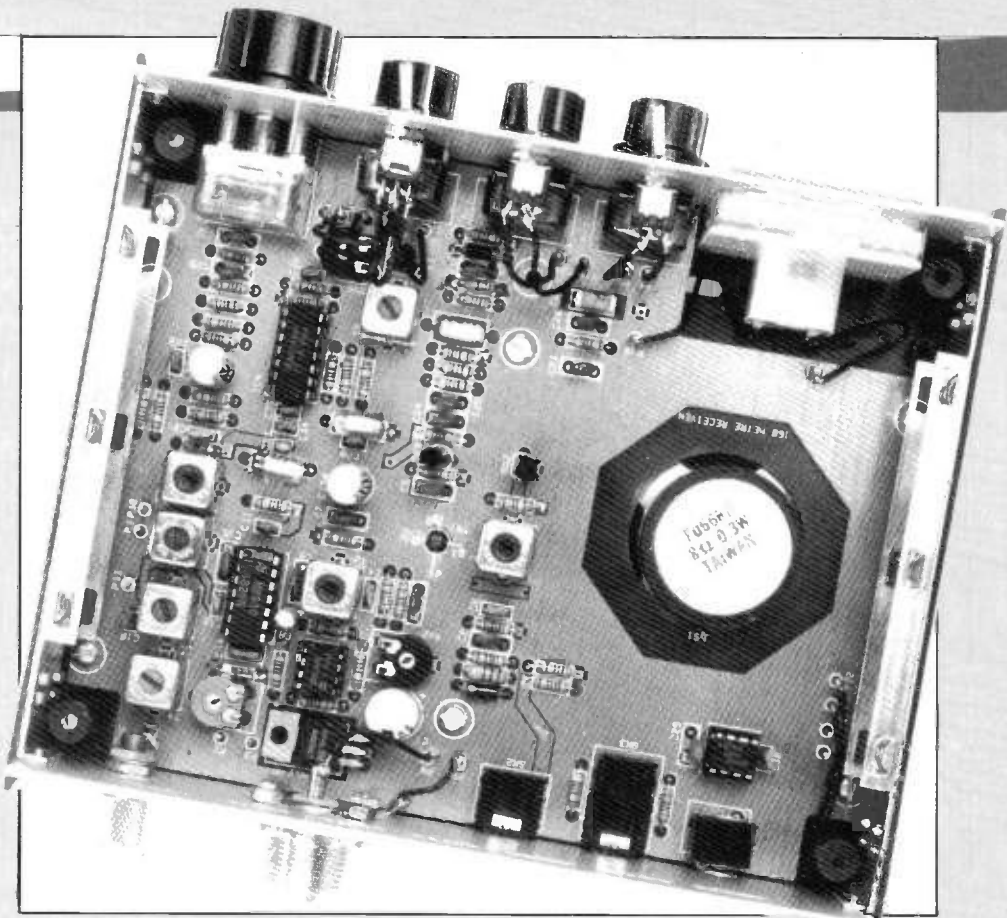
Inside view of the prototype unit showing the completed PCB fitted and wiring to switches, aerial and earth.
